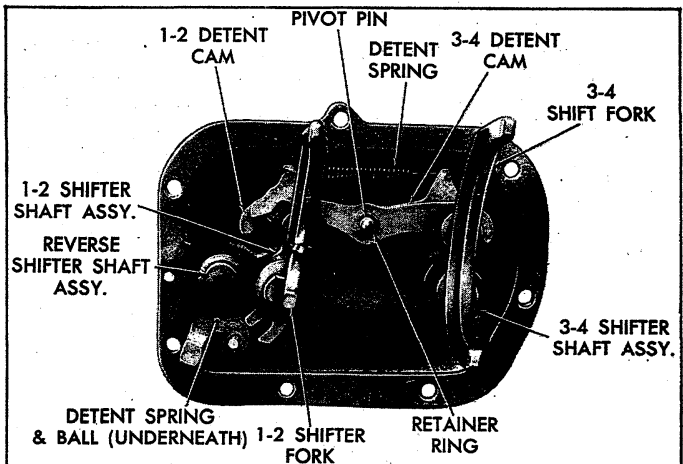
X - Transmission Side Cover, Shift Fork and Detent Assembly
